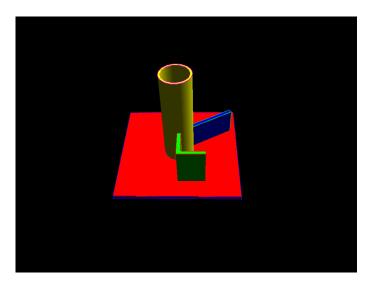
A test part containing round pipe. Corners, vertical and horizontal welds were correctly executed. Round pipe is rarely round; through-the-arc sensing mitigated roundness problems, but caused drift away from weld on one vertical weld.
